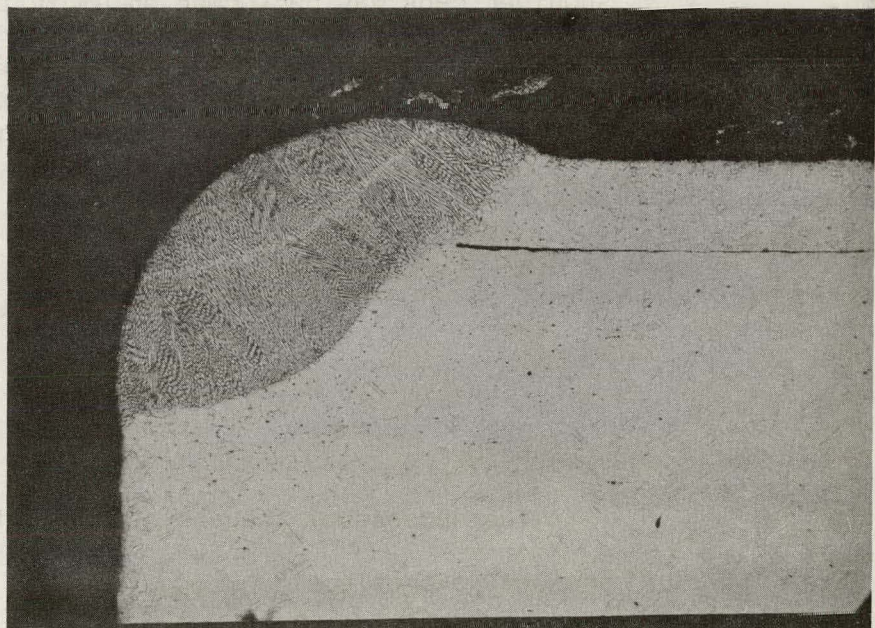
Typical weld of reduced shoulder cap to 0.010 in. tube wall
